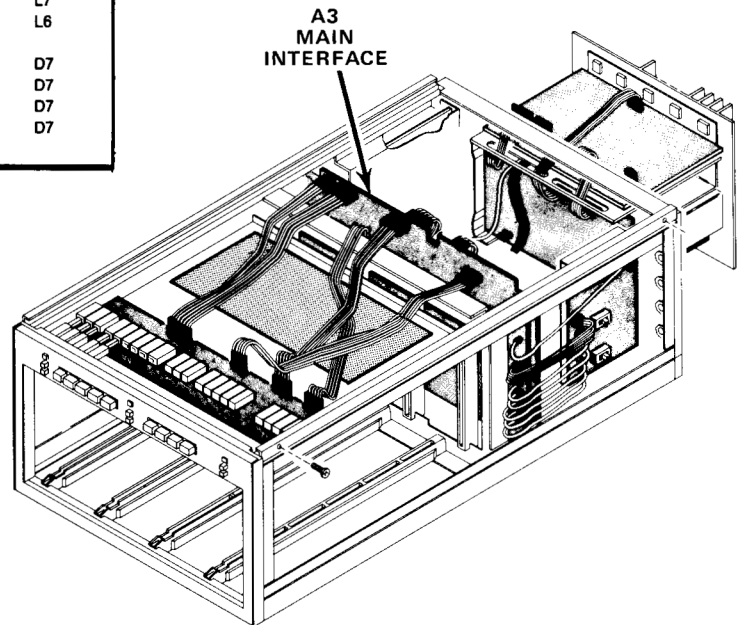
A3-Partial Main Interface Circuit Board Assembly.
